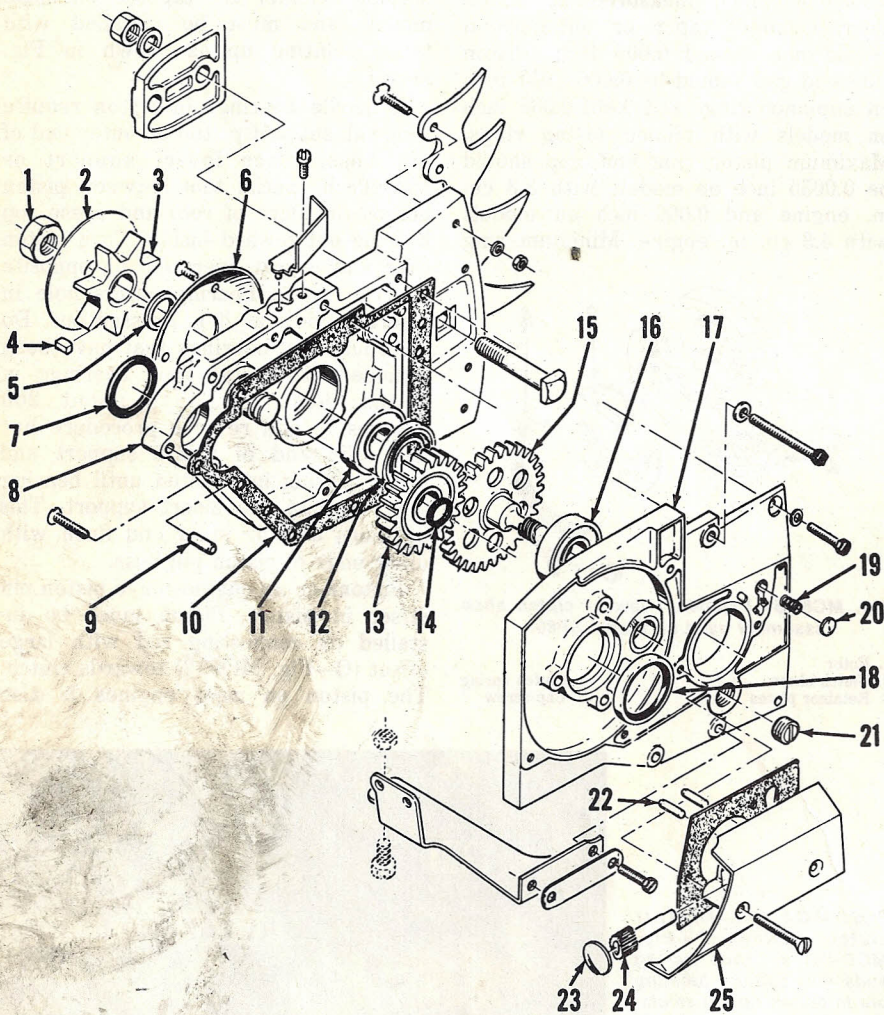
Exploded view of gear transmission used on Models LG-2, LG-6 and G-70.
